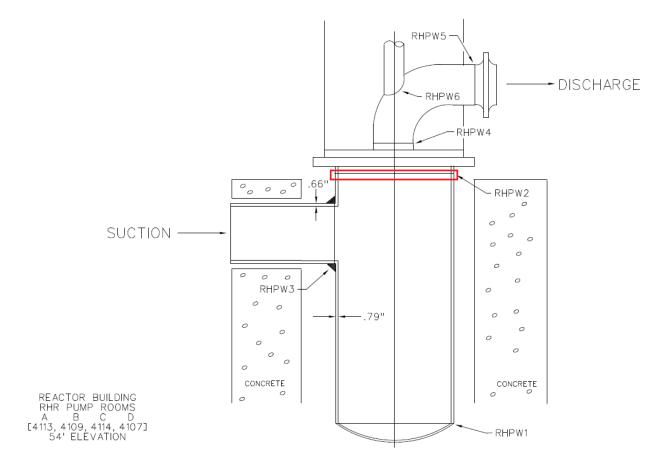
Weld 1-CP-202-RHP-W2 (Extracted from Reference DWG B-3)
